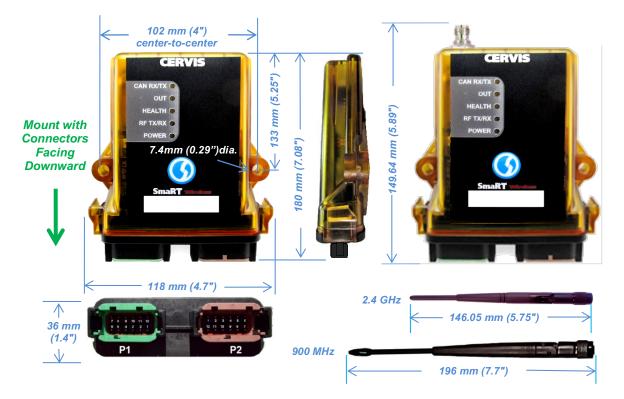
Mounting Holes and Cable Connectors P1 and P2
